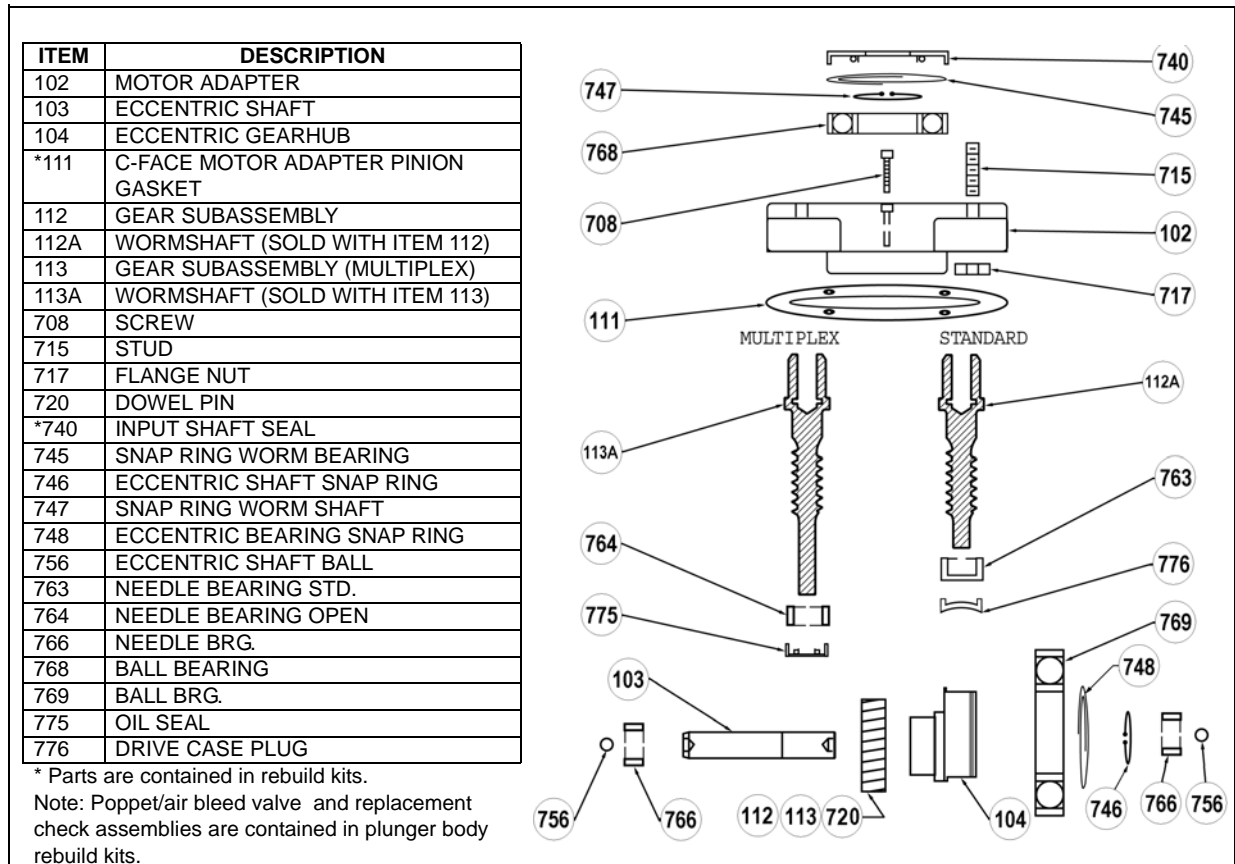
Motor Adapter/Eccentric Shaft Assembly.
